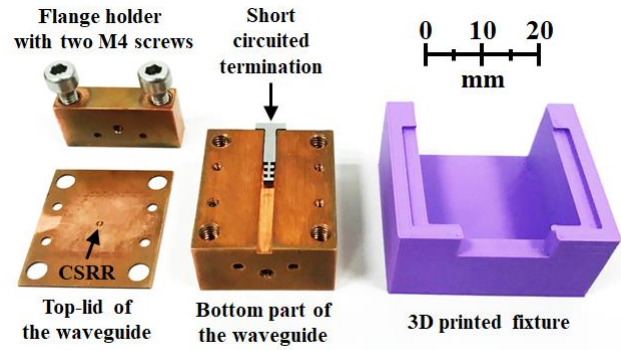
Fabricated sensor before integration, consisting of the bottom of the waveguide, a single CSRR machined into the top broad wall of the waveguide, flange holder with two M4 screws, the short circuited termination, and 3D printed fixture.
